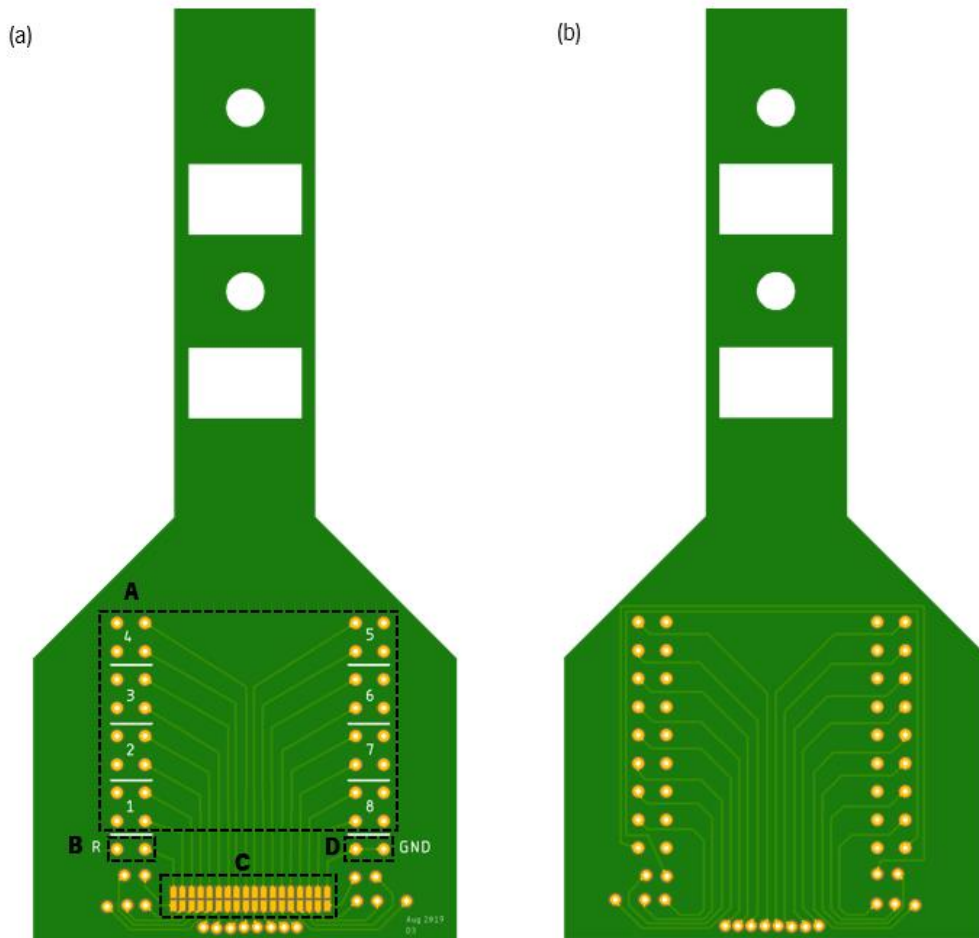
Electrode interface board design on Eagle software. (a) – Front view: (A) – tetraode holes, (B) – reference holes, (C) – connector pads, (D) – ground holes. (b) – Back view.
